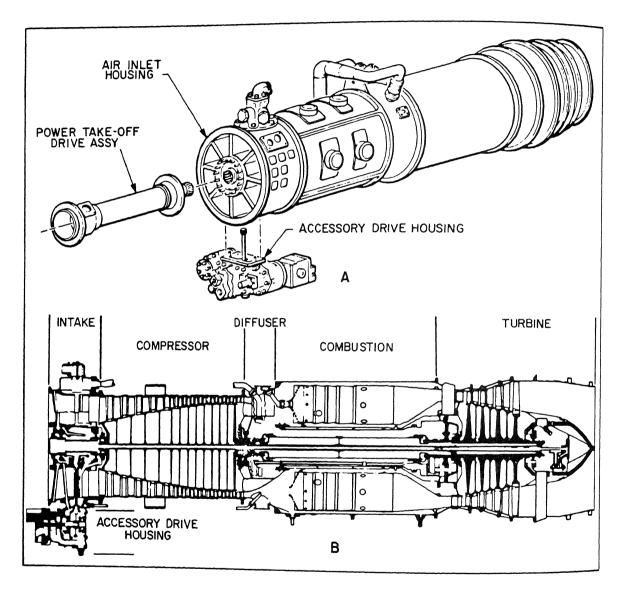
Allison 501-K17 gas turbine engine; (A) overall view, (B) cutaway view.
